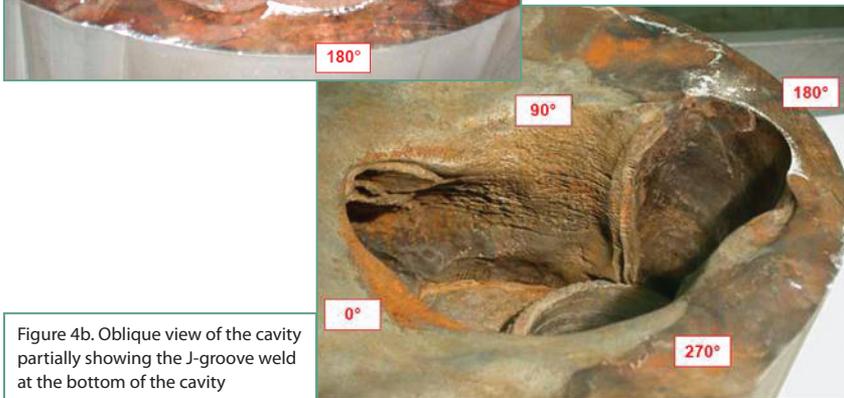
Oblique view of the cavity partially showing the J-groove weld at the bottom of the cavity
